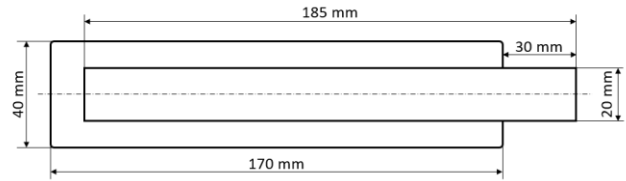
Dimensions of the peeling test pieces based on VDI 2019 [12].
